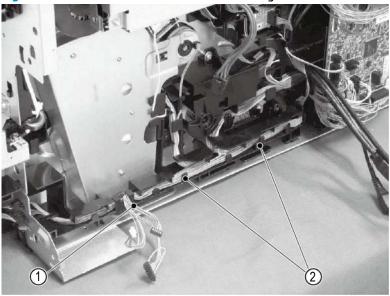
Pull one cable and the FFC through the formatter cage
